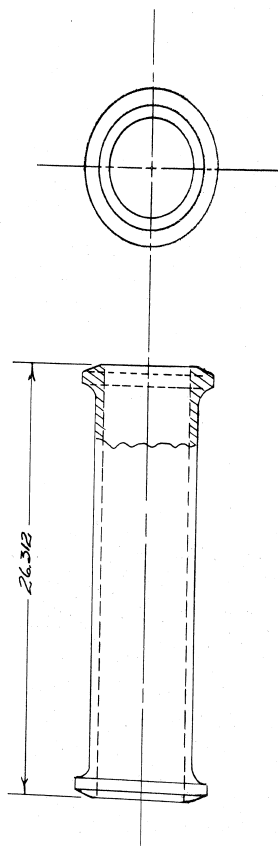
P/N 256970 - Shaft, Turbine Rotor Front, Material Ti-6Al-4V
